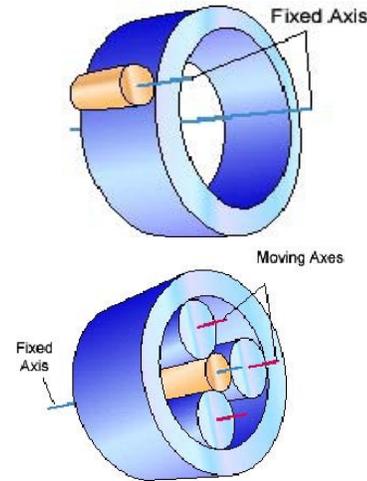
Fixed axis “standard”gearPlanetary” epicyclical “gear system
